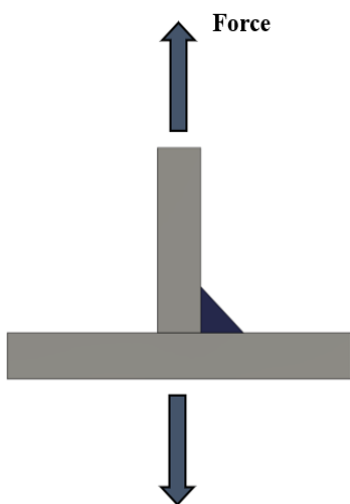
Loads present in perpendicular or transverse loaded weldment.
